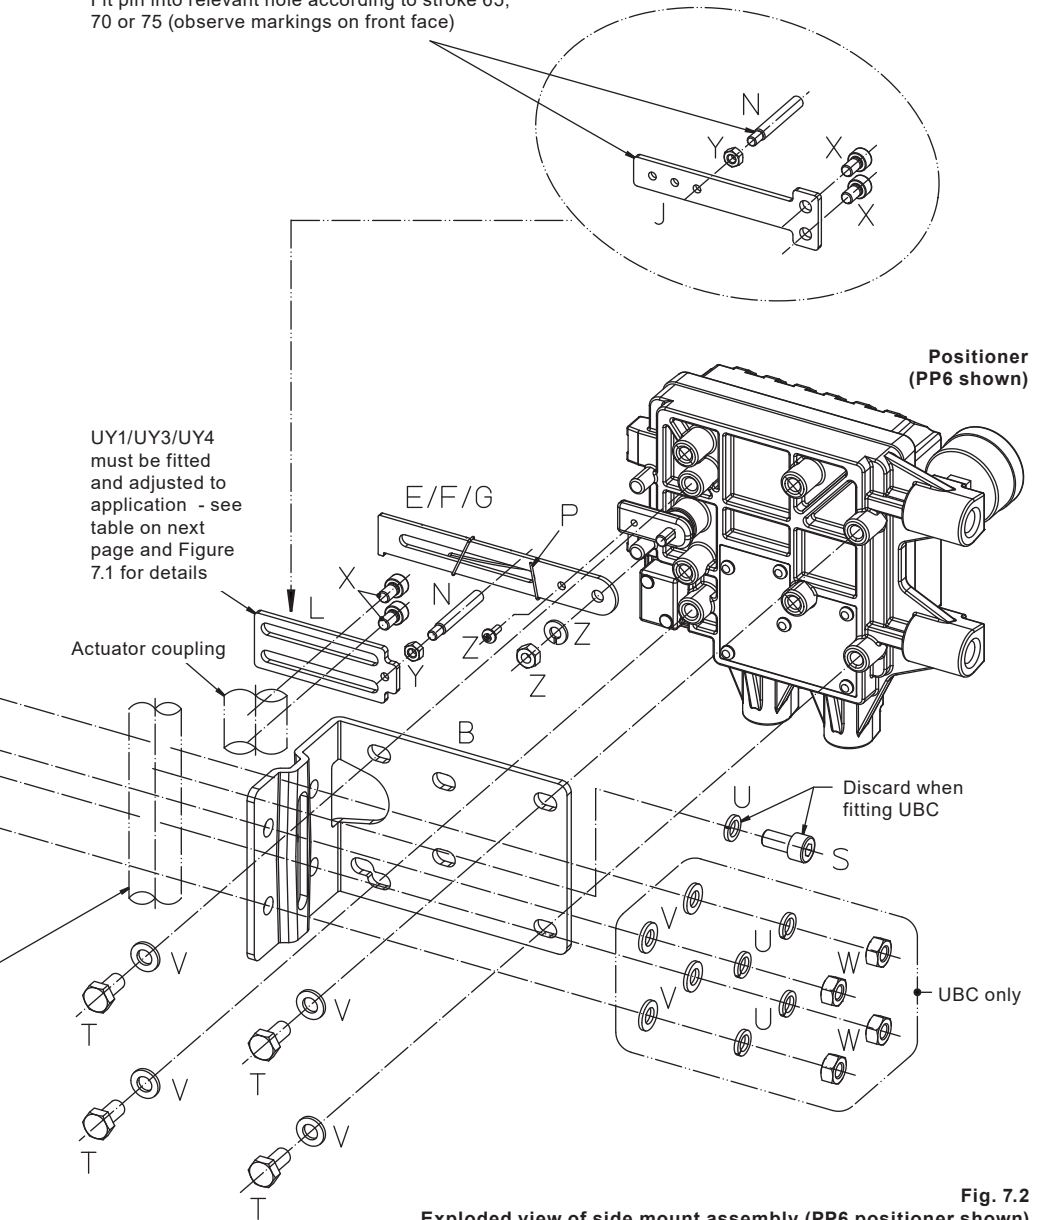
Exploded view of side mount assembly (PP6 positioner shown)
